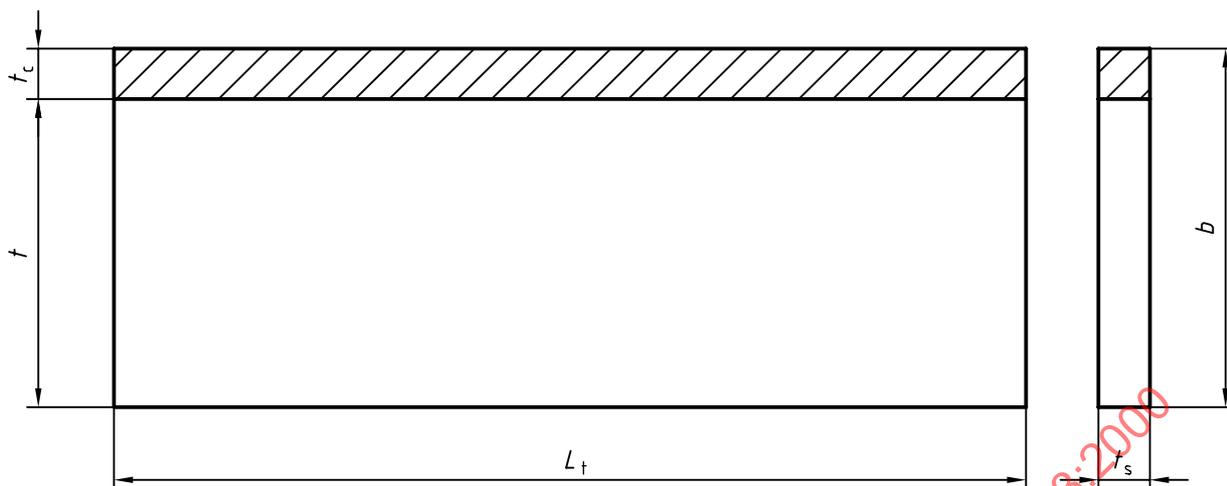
Side bend test specimen for cladding without a butt weld (SBC)
